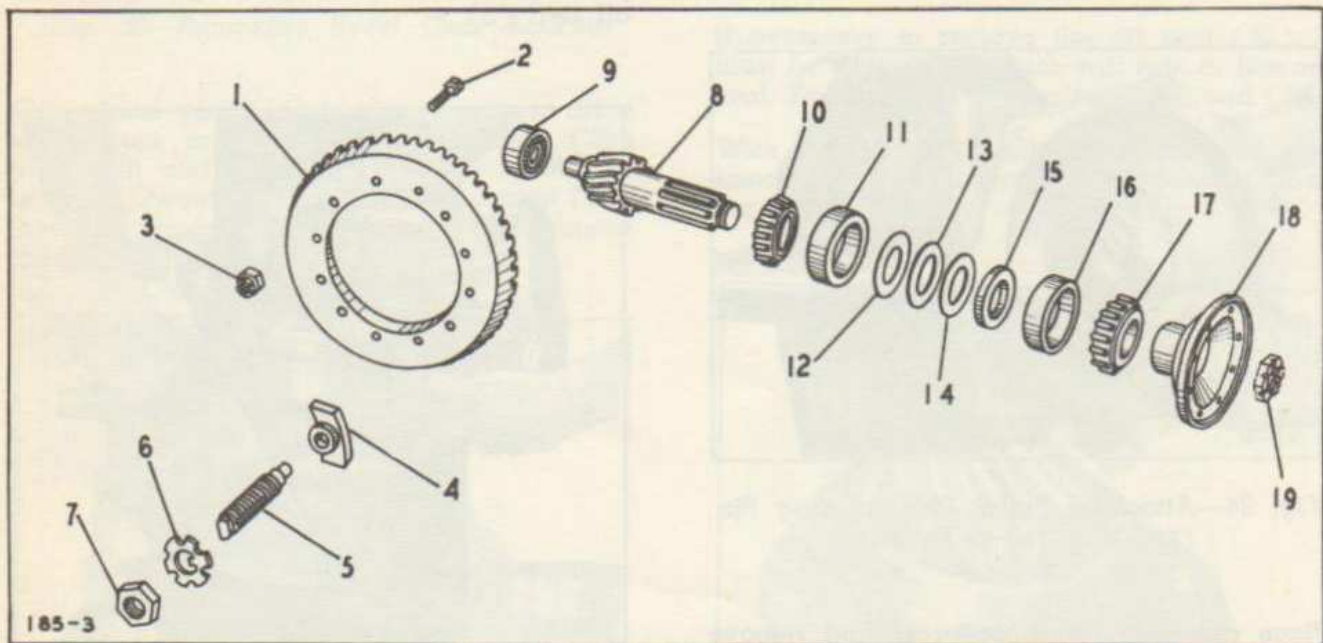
Exploded View of Bevel Gears of Axle Drive Unit
